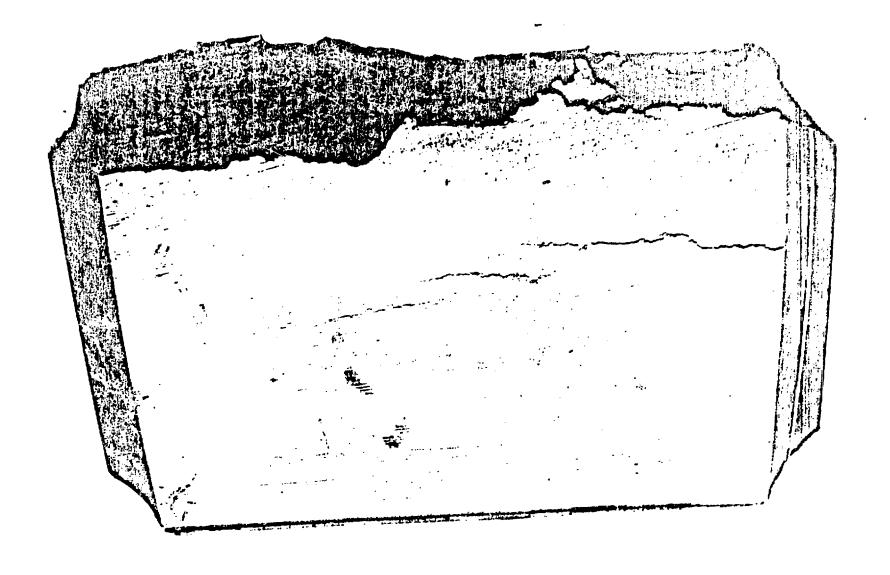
Cut portion of Generator End Disc showing amount of secondary cracking after failure (Yankee-Rowe Turbine)
